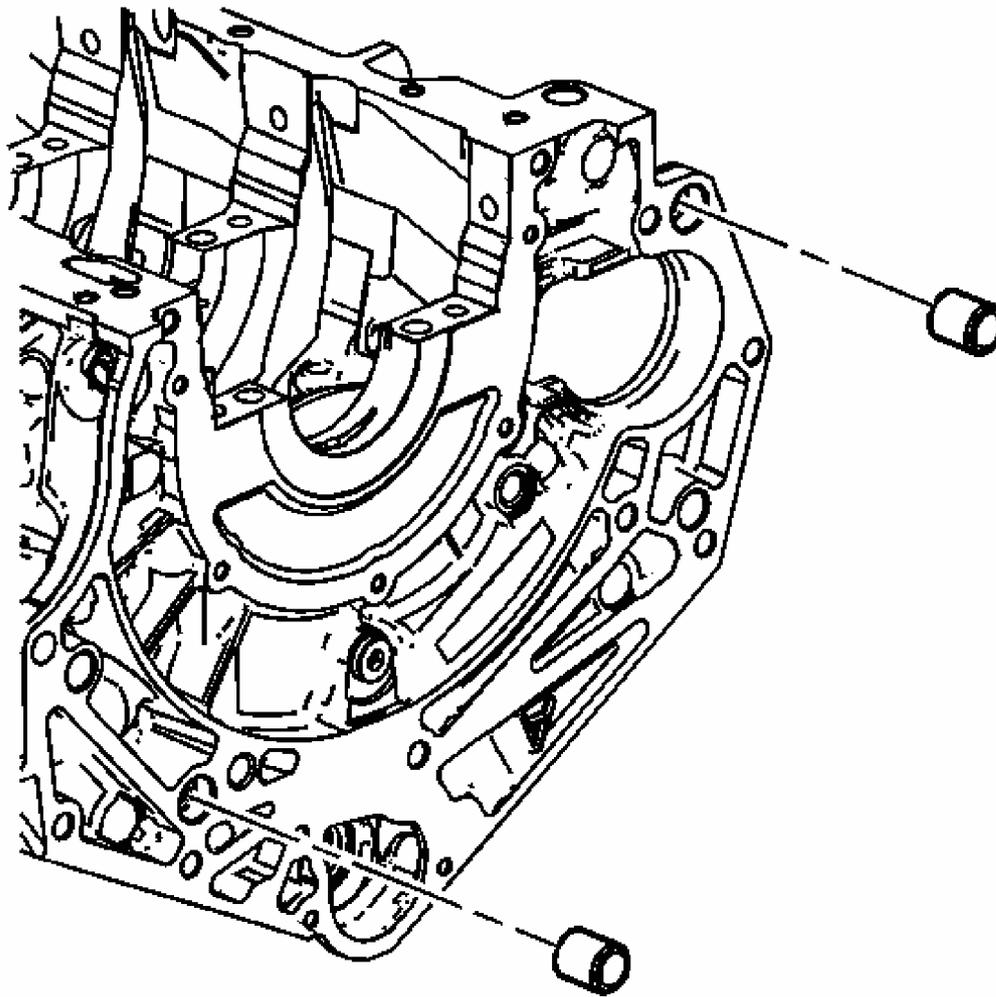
Cylinder Block-To-Transmission Alignment Dowels
